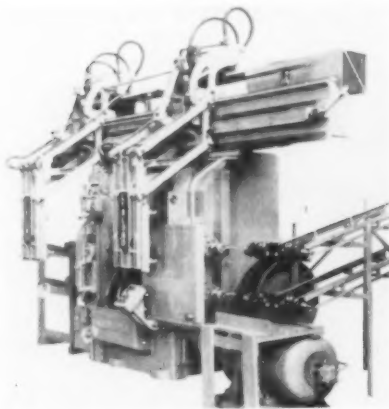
Crankshaft lathe showing automatic loading mechanism. Note the two sets of hooks on each arm.
